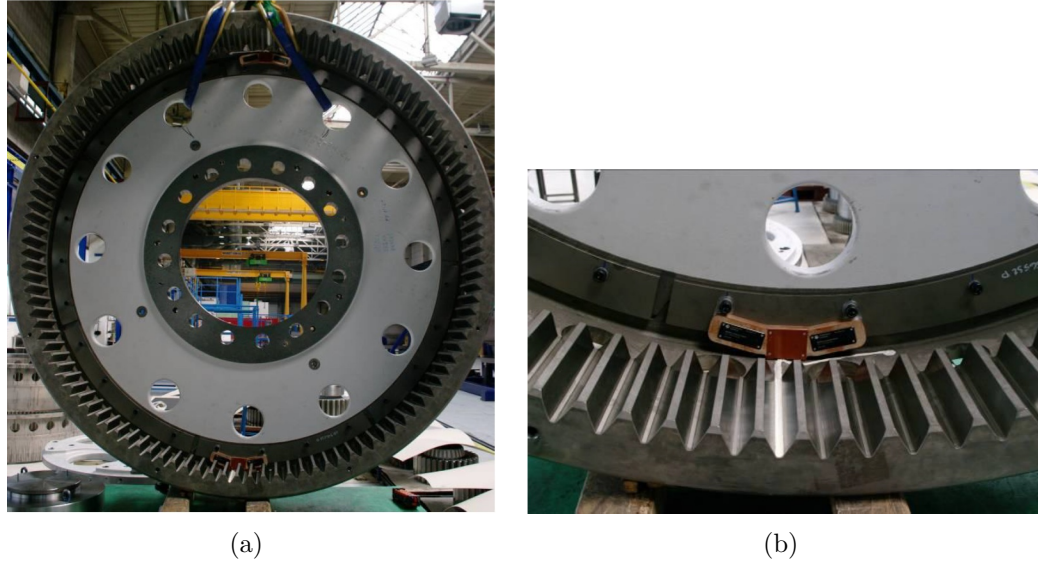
(a) Stage 1 ring gear with gear alignment modules installed at six and twelve o'clock [48] and (b) Strain gauges in the root of the stage 1 ring gear connected to a gear alignment module (gauges covered with a protective white coating) [48].
